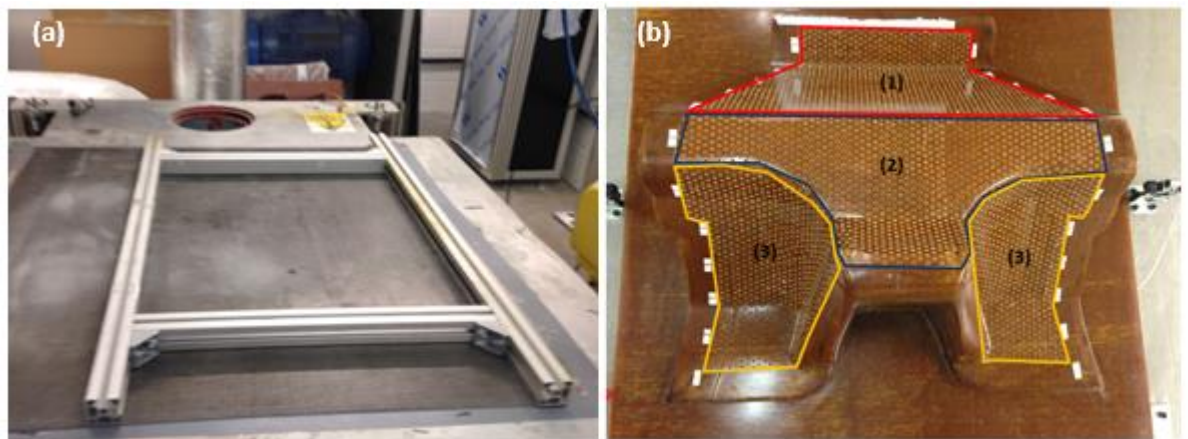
(a) Frame used to make 2D 700mm*600mm preforms; (b) the 3D tool used for 'T-shirt' preforms
